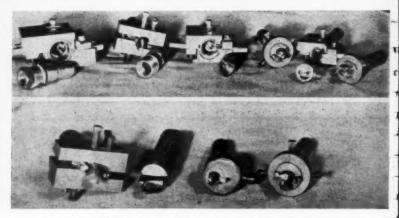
(Upper) Holders for producing four different kinds of fittings as shown in front of holders. Fig. 3—(Lower) Old and new types of holders contrasted.
